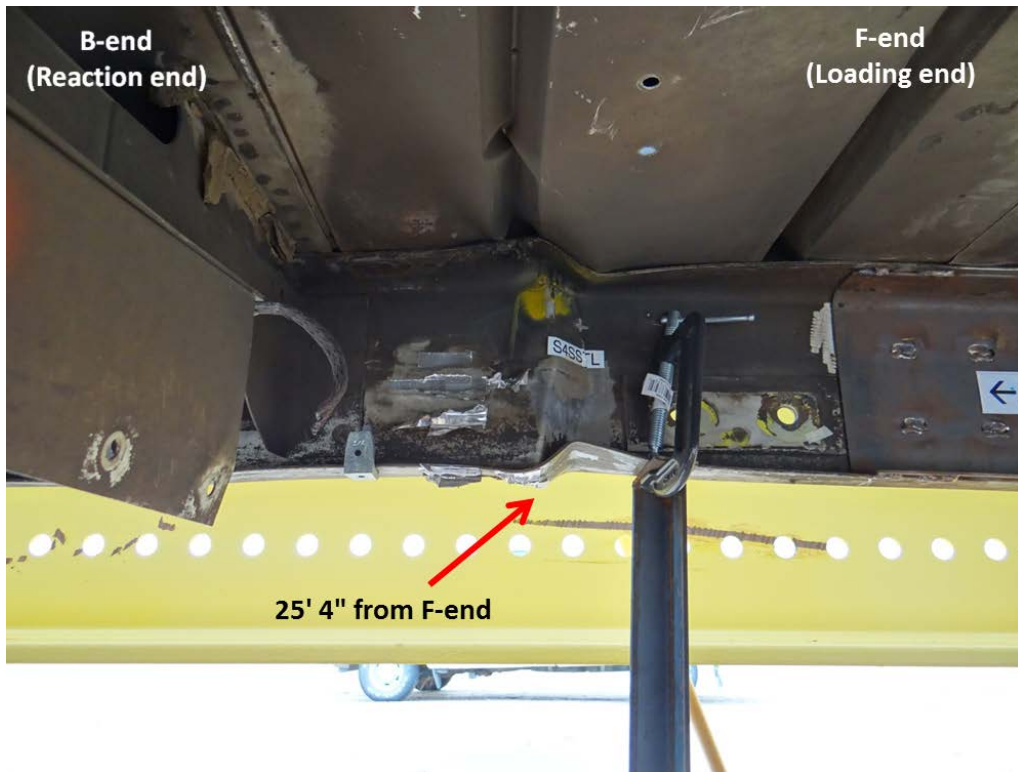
Post-test — Left Side Sill Buckle at Section 4 near Patch
